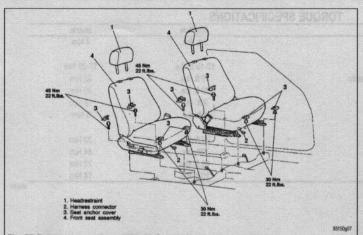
Front seat mounting—1994-98 Galant shown, others similar
